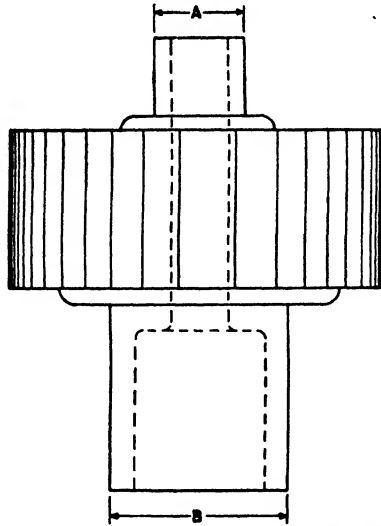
Machine A and B 0.004" to 0.007" oversize.
